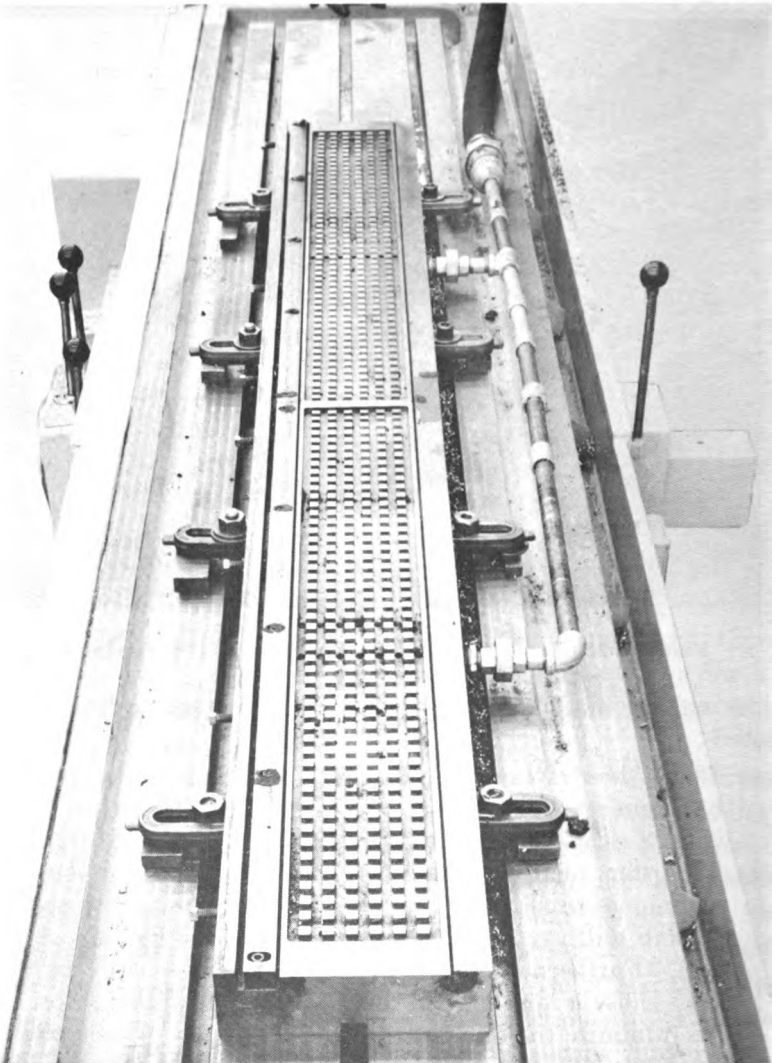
Vacuum Chuck for Face Milling Hafnium Plate.
